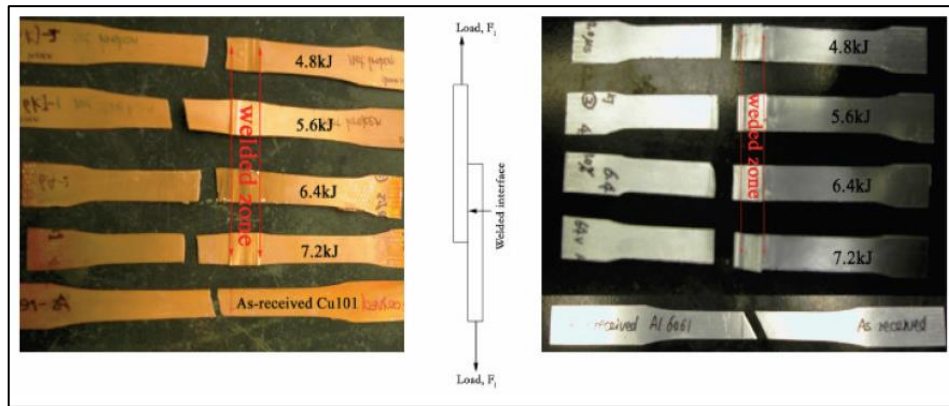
Mechanical tests showing failure outside the welded zone [82]
